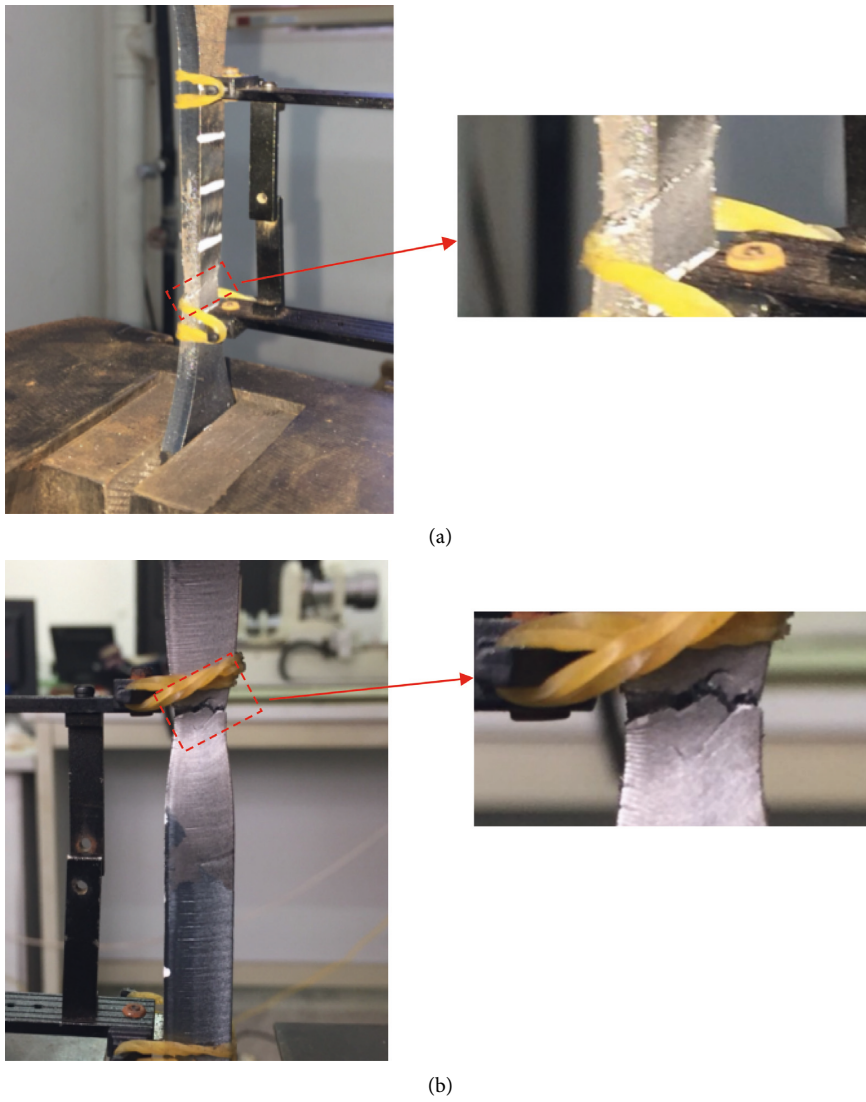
(a) Failure mode II of specimens with welded joint. (b) Failure mode III of specimens with welded joint.
